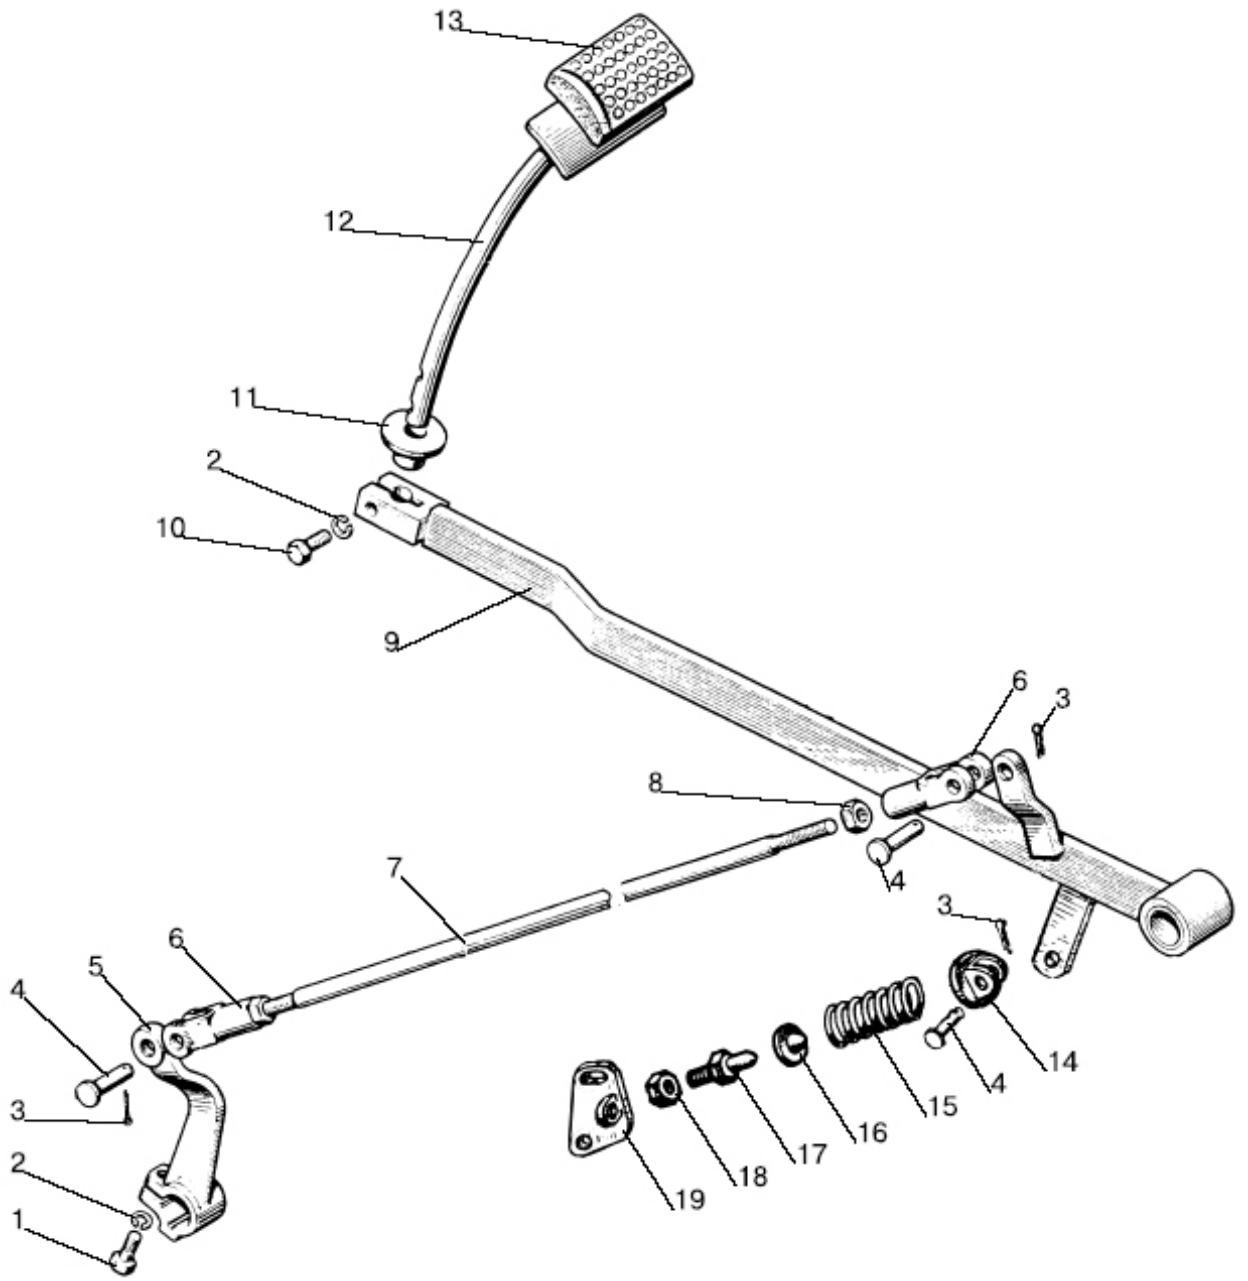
Clutch control ("BELARUS-1221/1221.2/1221.3")
